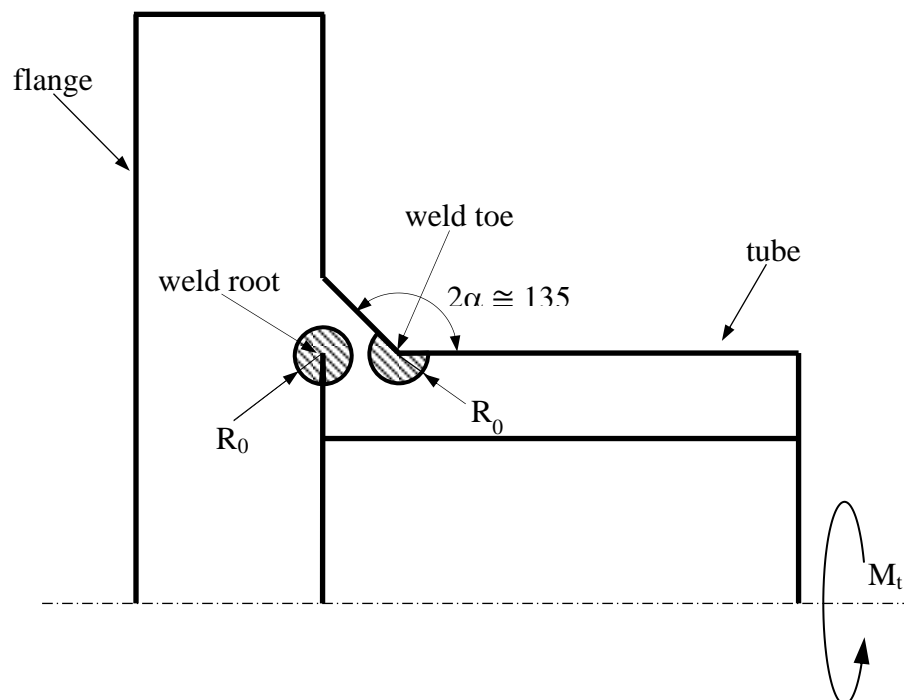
Assumptions of the NSIF-based approach in the fatigue design of welded joints. Geometrical model of a tube-to-flange fillet-welded joint. The sharp V-notch opening angle 2α is typically 0° at the weld root and 135° at the weld toe.
